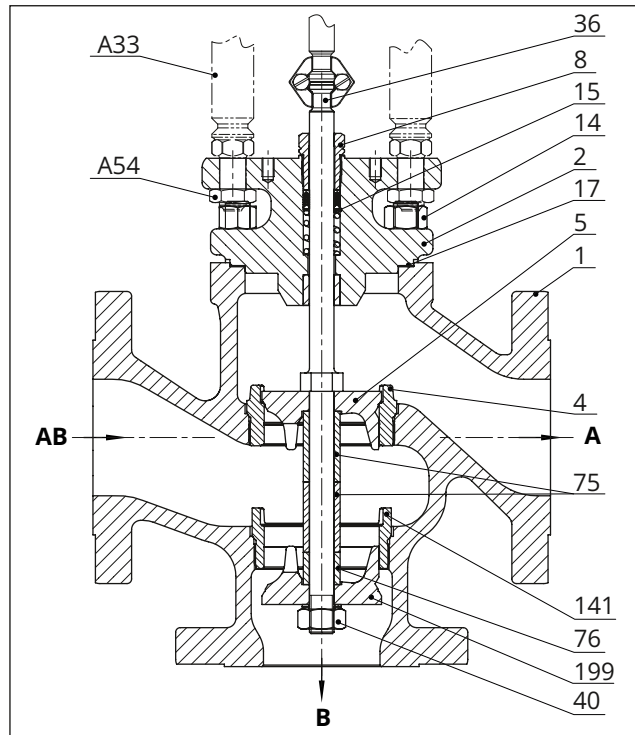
Type 3323 Valve (diverting valve), DN 65 to 100/NPS 2½ to 4 · Mounting using rods (form C attachment)
